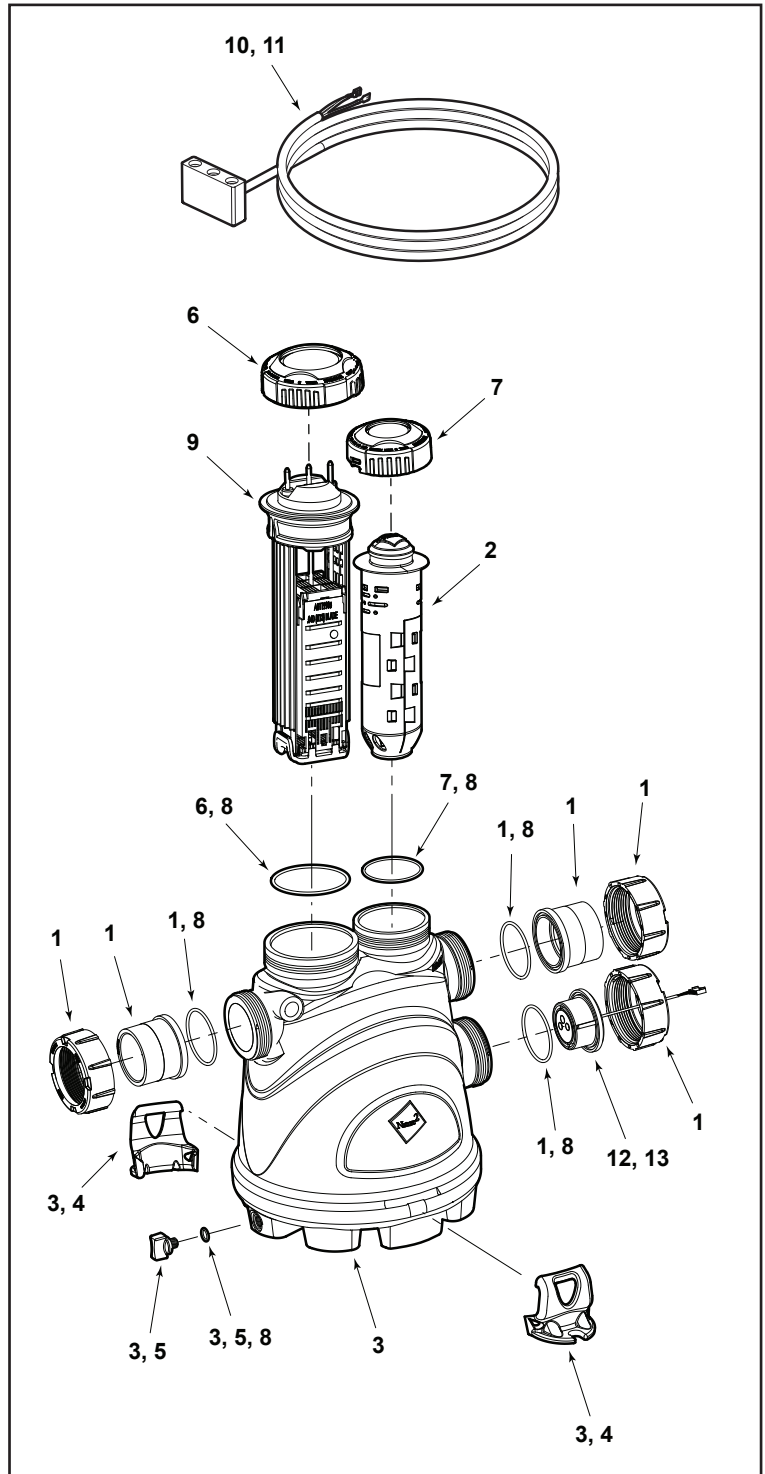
Nature<sup>2</sup> Fusion Soft Vessel Exploded View
